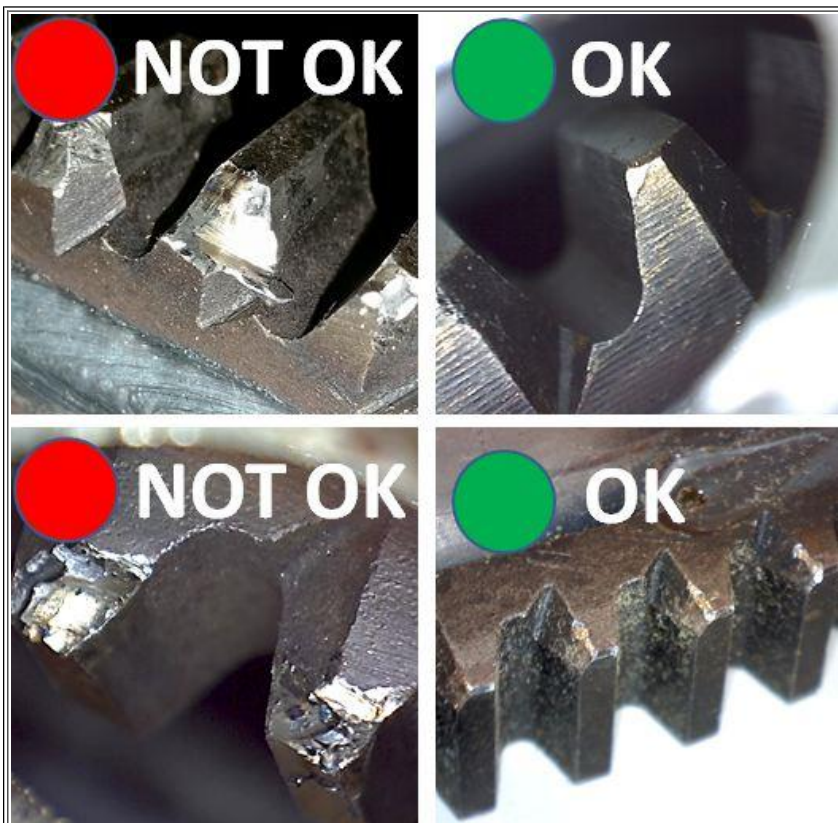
Flexplate/Flywheel Ring Gear Acceptance
